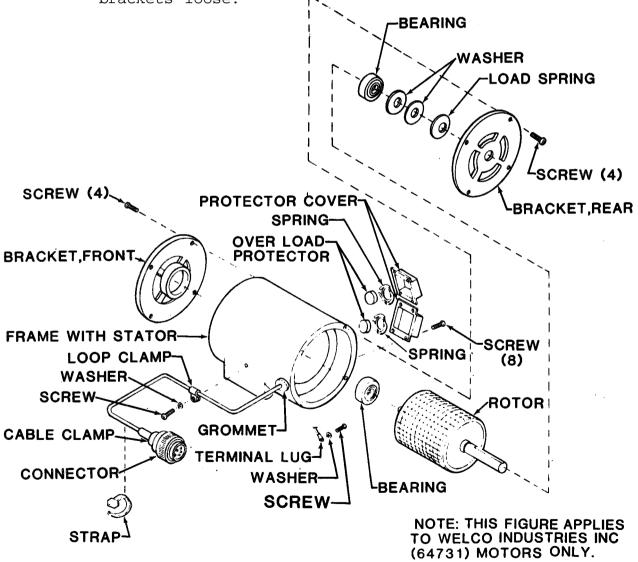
Motor Assembly, Welco Model M-4720-26A
